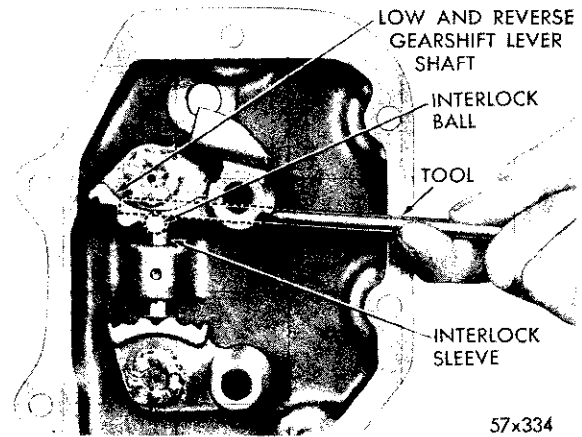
Depressing Interlock Ball—Using Suggested Tool
